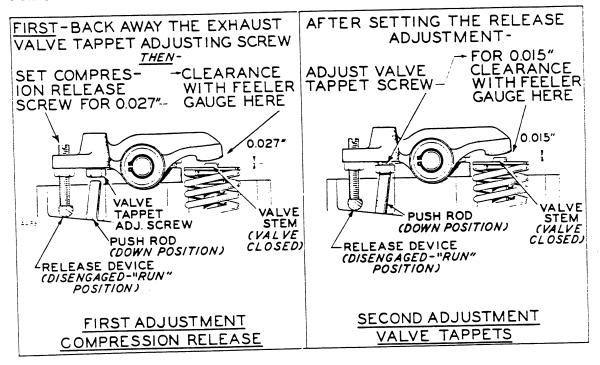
ADJUSTING VALVE TAPPET CLEARANCE
